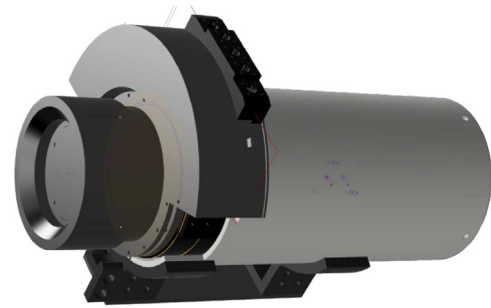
The Planispherical GEM detector assembly, complete with the CCD camera holder [45].
